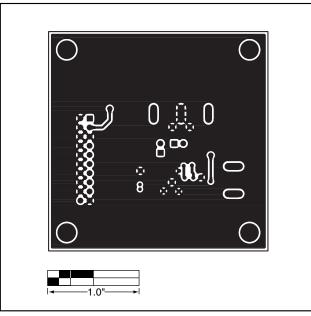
MAX6900 EV Kit PC Board Layout—Solder Side
